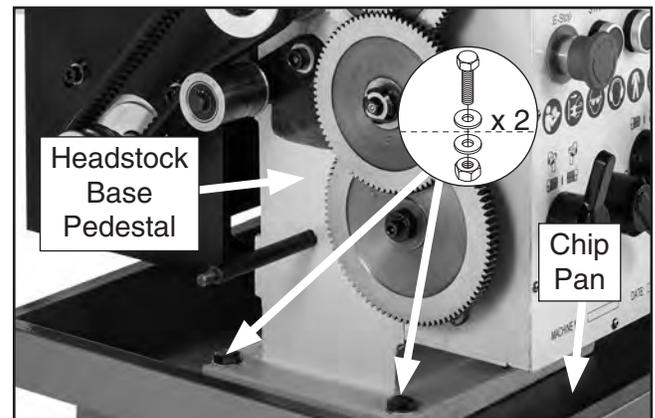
Lathe attached to stand and chip pan (left side mounting hardware shown).
